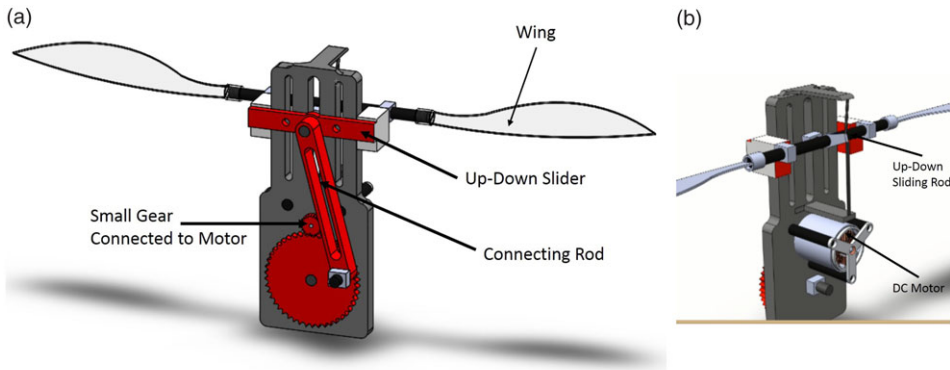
CAD model of the fabricated wing testing model, (a) front side of the model showing heaving mechanism and wings, (b) back side of the model showing DC motor and supporting elements.
